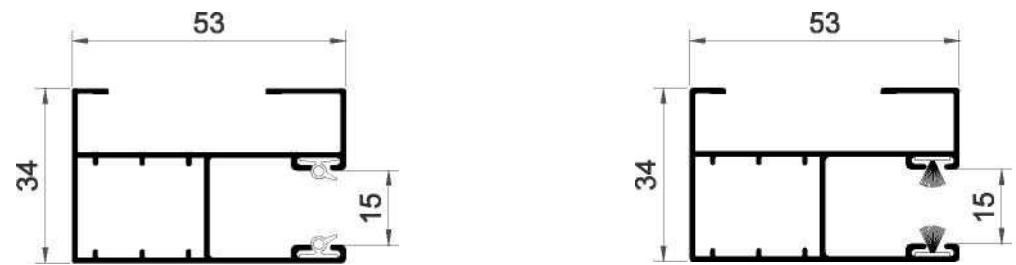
Cross-section side guide (PP53 / ODS), with a bottom slat or brush seal
